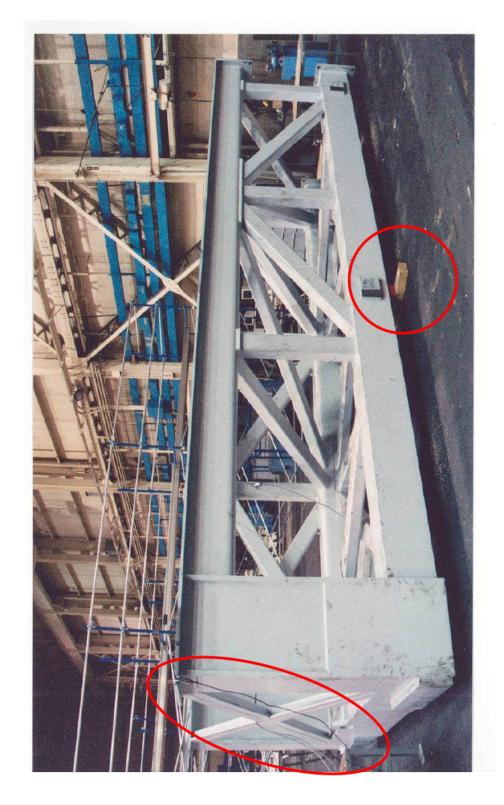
BL-8 Vibrator mounted to top of Workpiece; Placement of other two Load Cushions.
